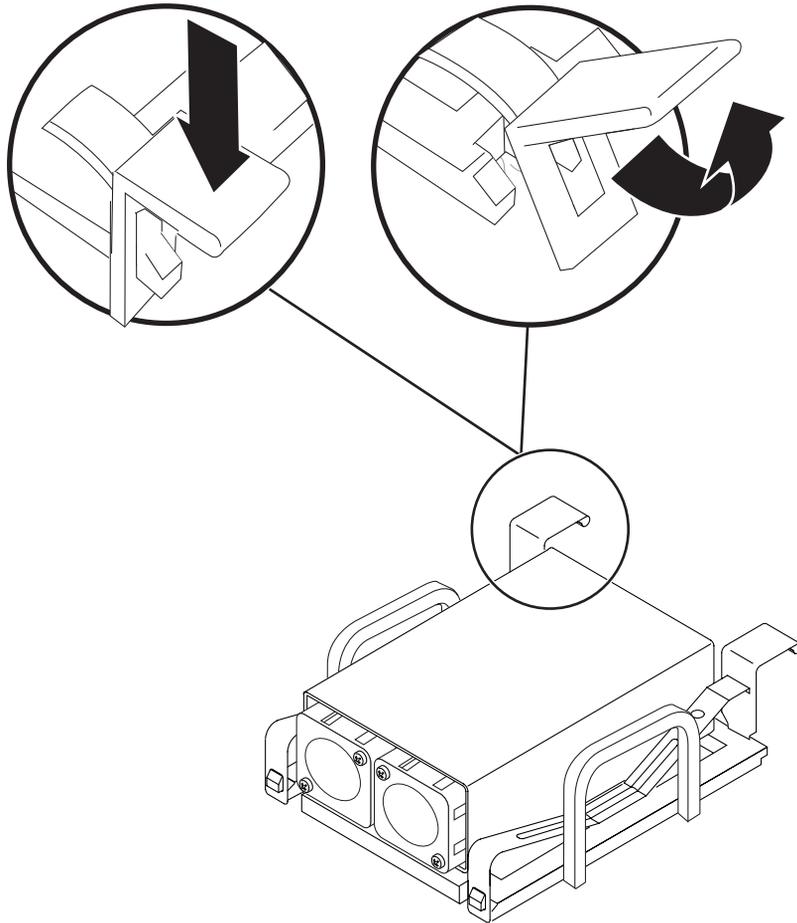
Unlocking the Heat Sink Fasteners
